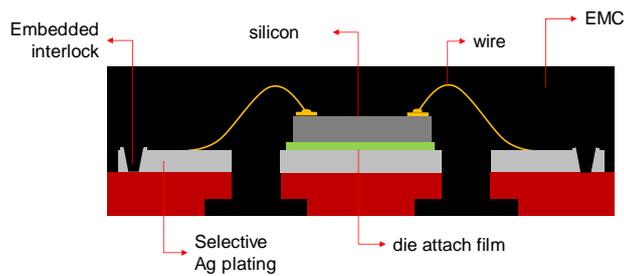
Cross-sectional package construction showing the different components of the assembly.
